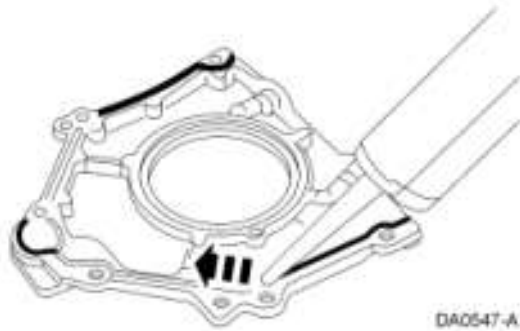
Applying Bead Of Silicone Gasket And Sealant Around Crankshaft Rear Seal Retainer Sealing Surface
